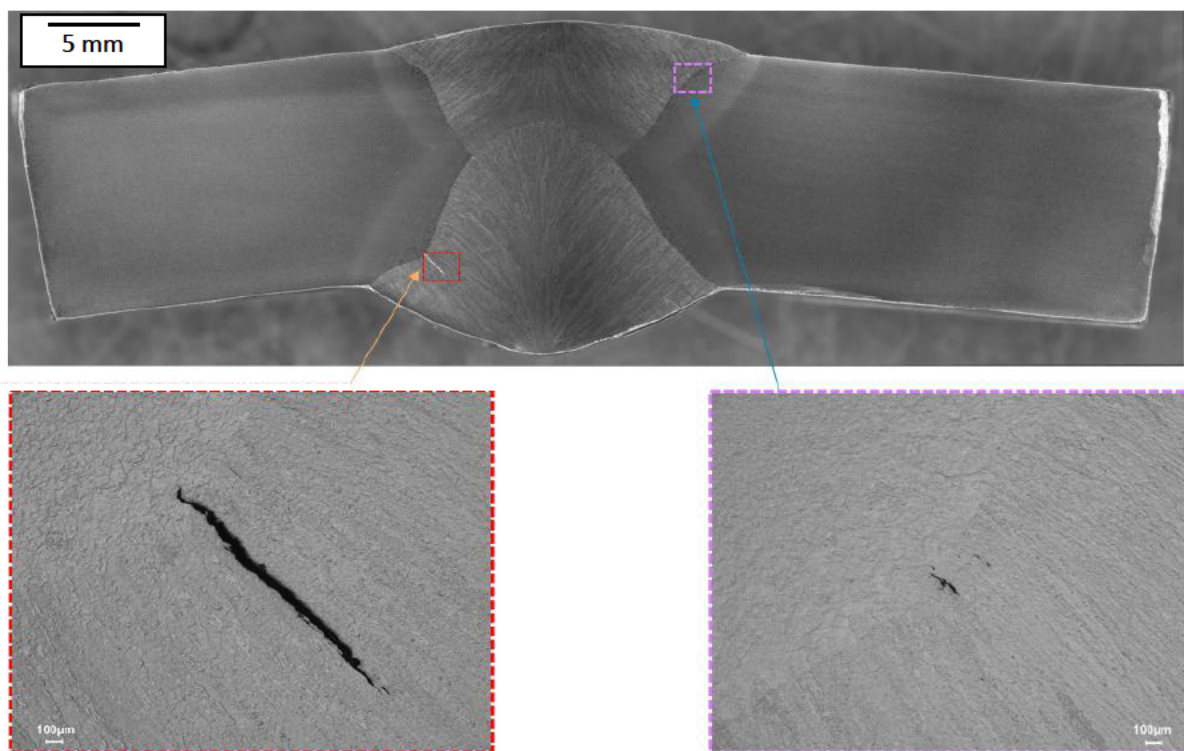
Macrograph of the seam weld of the X60A steel pipe showing the locations of microdefects in the weld metal.
